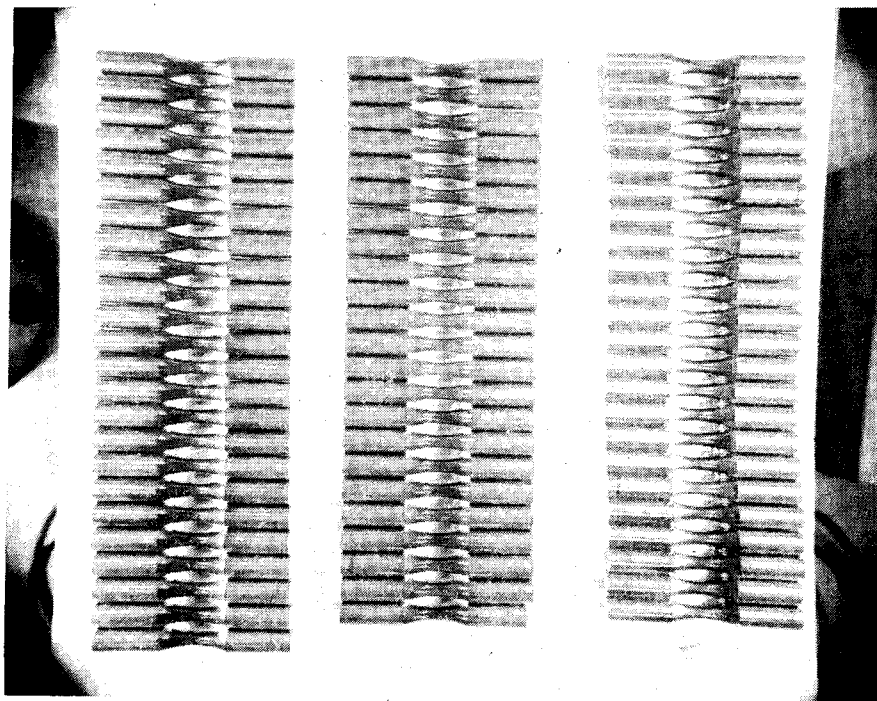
Photograph of 70 Finished Rotating Beam Specimens
